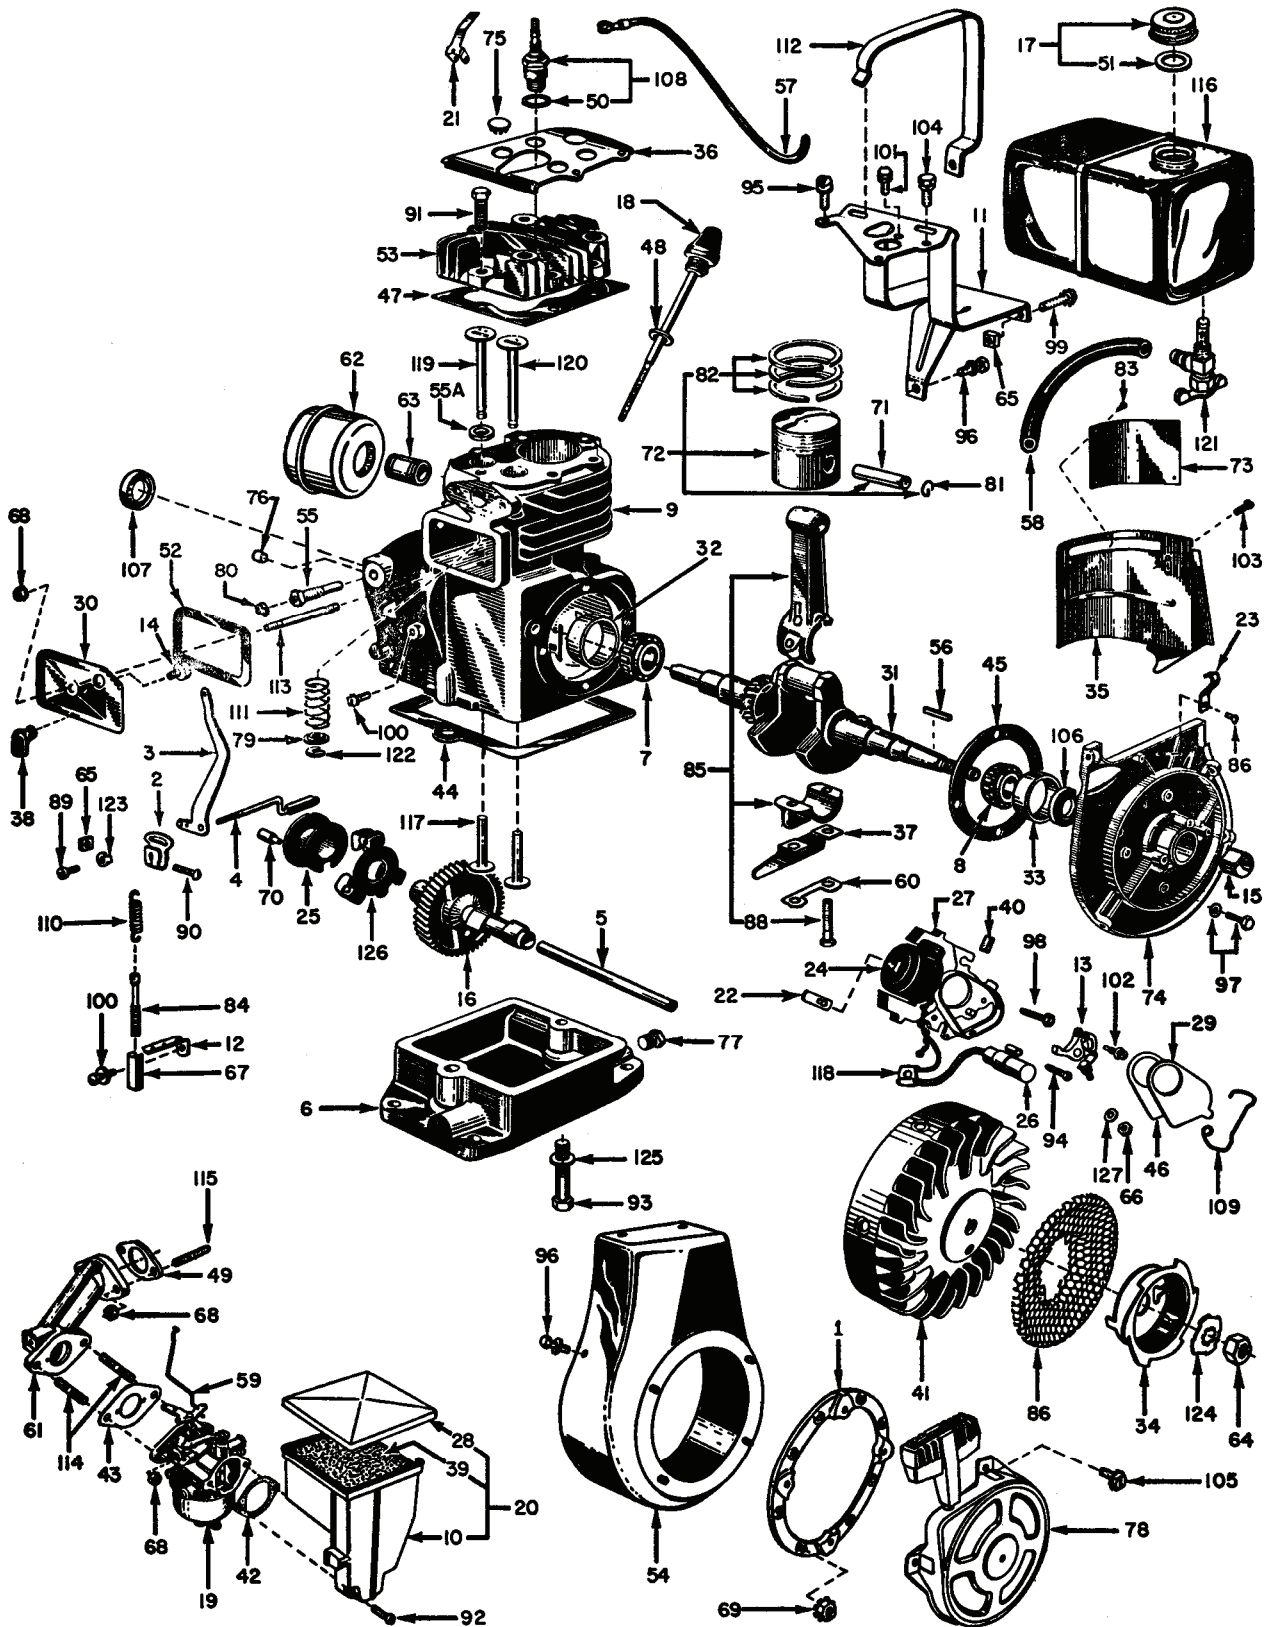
Exploded view of model 498-0000-000 engine. Governor weight assembly (126) is retained to camshaft gear by pin (70) that is pressed into the gear.
